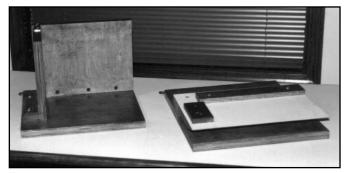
On the right is the double page-making fixture. The book assembly jig is on the left and will be referred to later.
